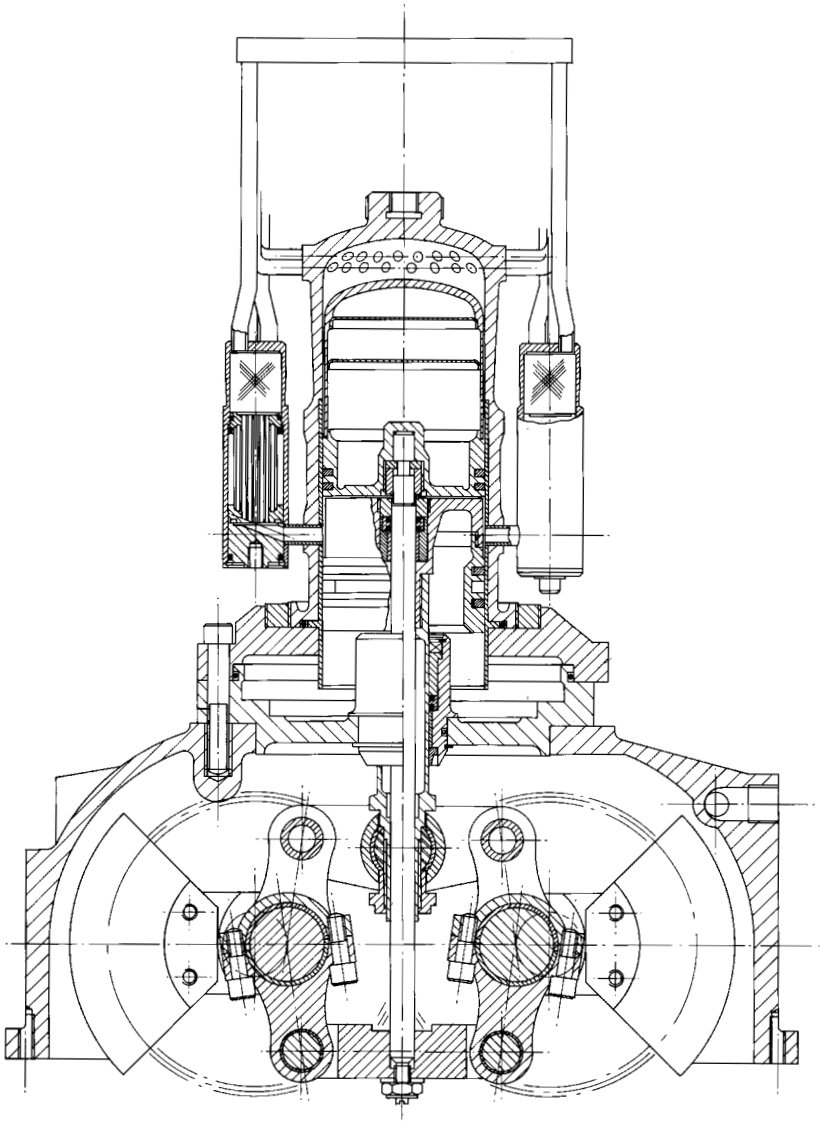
General Motors' GPU-3 engine in cross-section. After Organ (1997a) where the drawing is reproduced to a larger scale and accompanied by a detailed specification
